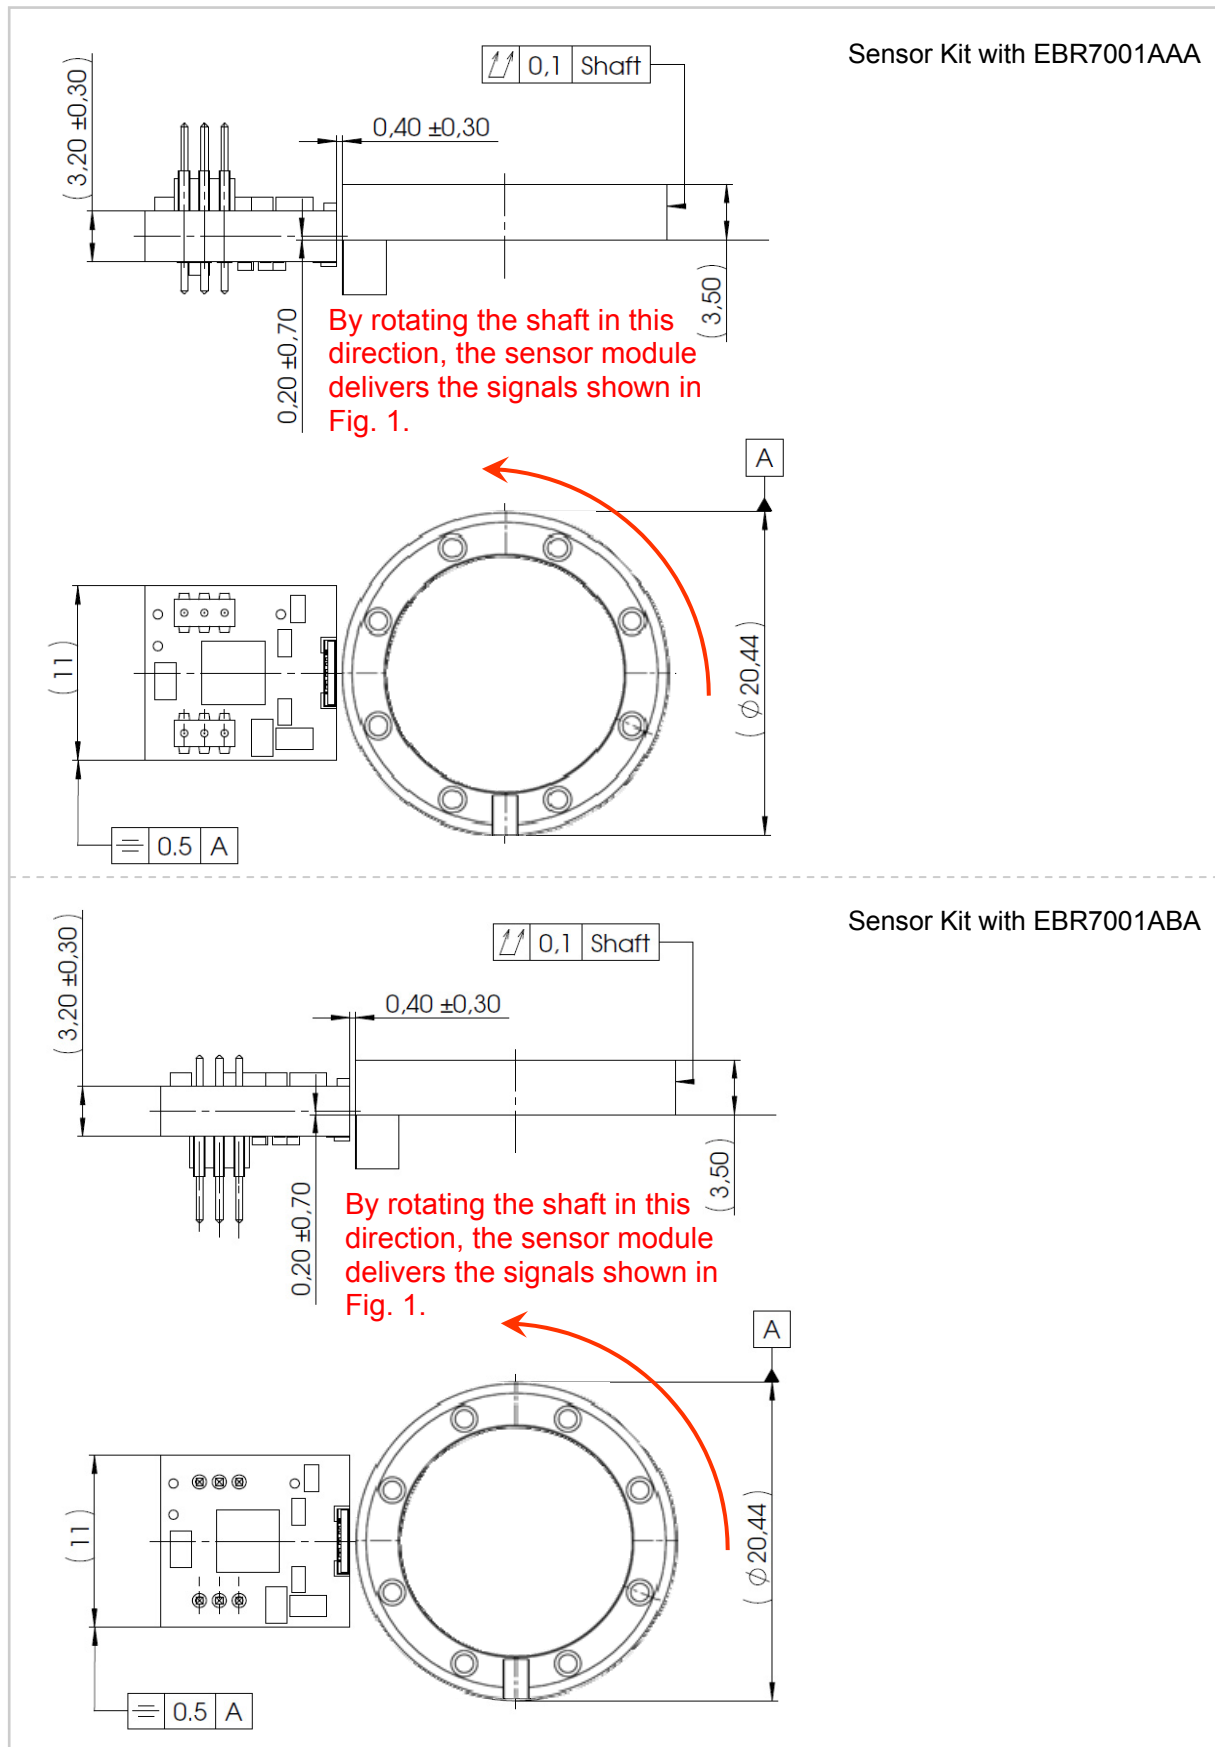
PCB adjustment to the magnetic pole ring (all dimensions in mm unless otherwise specified).
